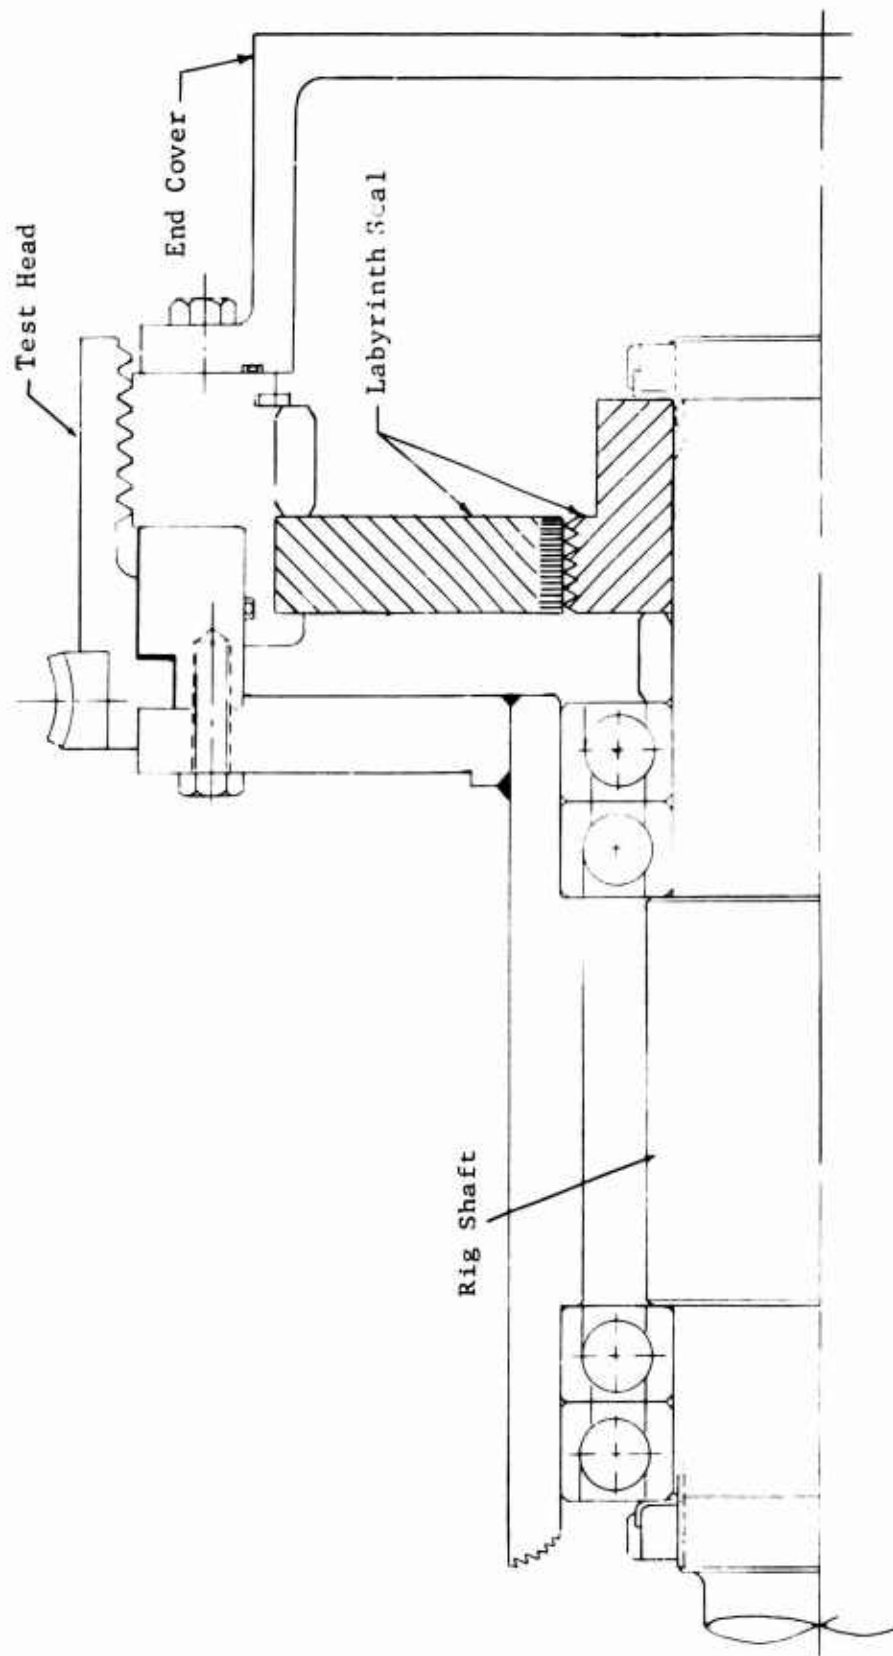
Rotating Seal Rig Test Head With Labyrinth Seal Installed.
